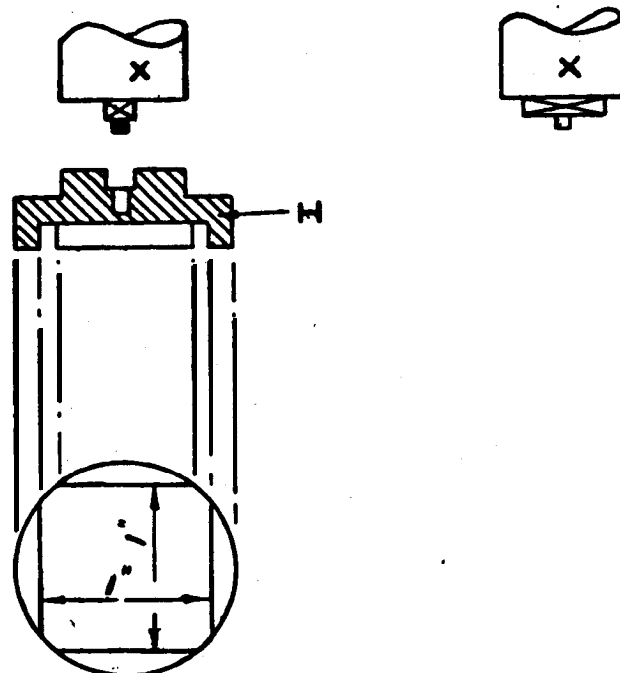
ENLARGED DIAGRAM OF SPECIMEN HOLDER.
